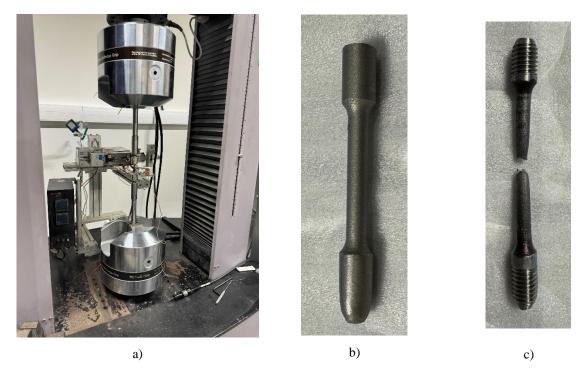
Tensile testing a) machine during test, b) specimen before testing, c) specimen after testing
